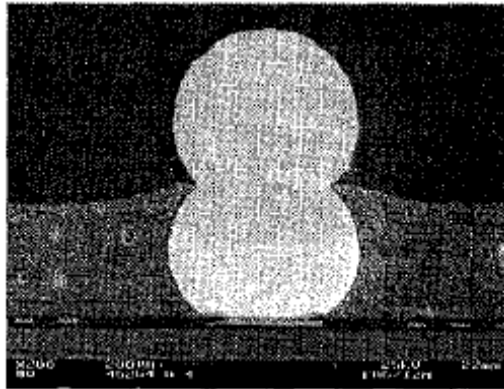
Cross-section of staggered solder balls with SCL on RDL in FIP-CSP packages [67]
